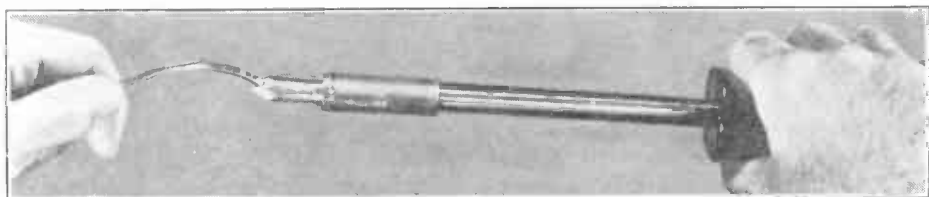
Correct way to hold the soldering iron while applying solder to one flat surface of the tip for tinning purposes. By keeping the flat surface approximately level, the tendency of the molten solder to roll off the tip is minimized.
